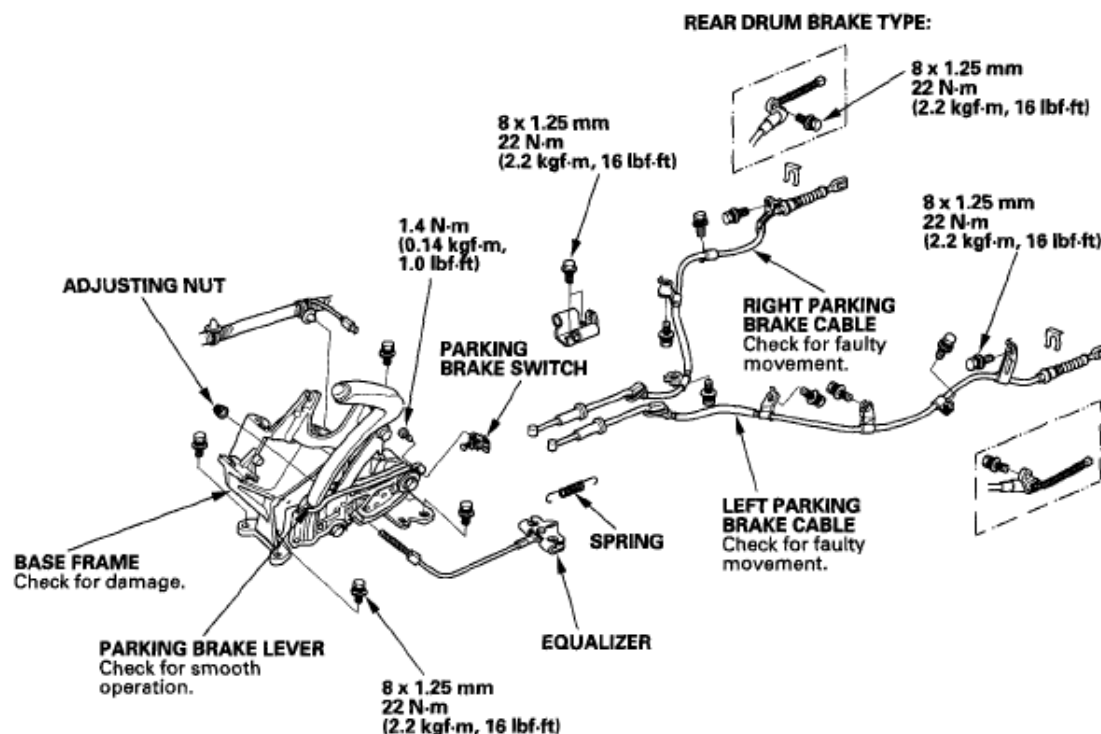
Exploded View Of Conventional Brake (With Specifications)
